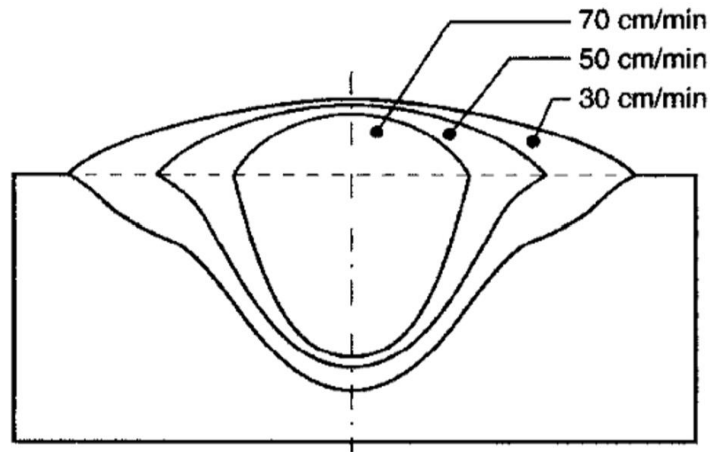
The demonstration of the effect of welding speed on weld appearance and penetration (Cross-section area of the weld) [26].
